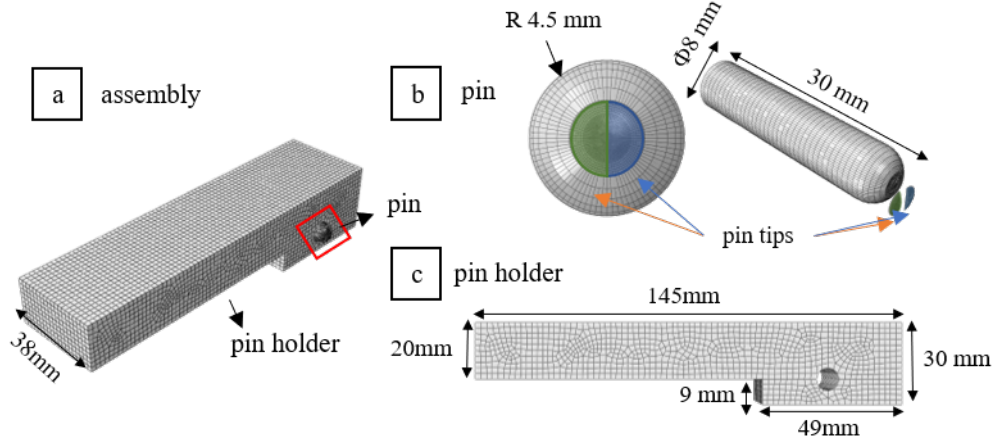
Description of the heat transfer implicit model (a) assembly, (b) pin and (c) pin holder.
